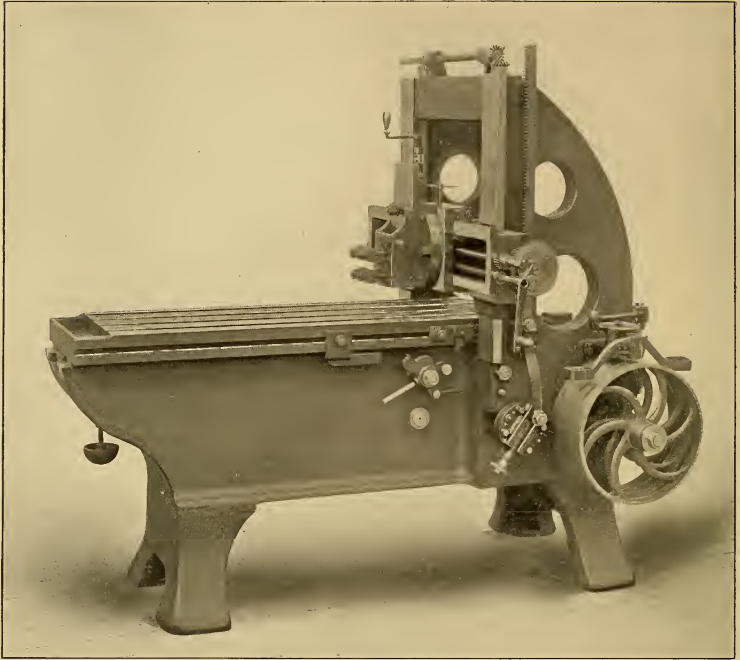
PLANING MACHINE. MADE BY MESSRS. C. REDMAN & SONS, HALIFAX, ENGLAND
